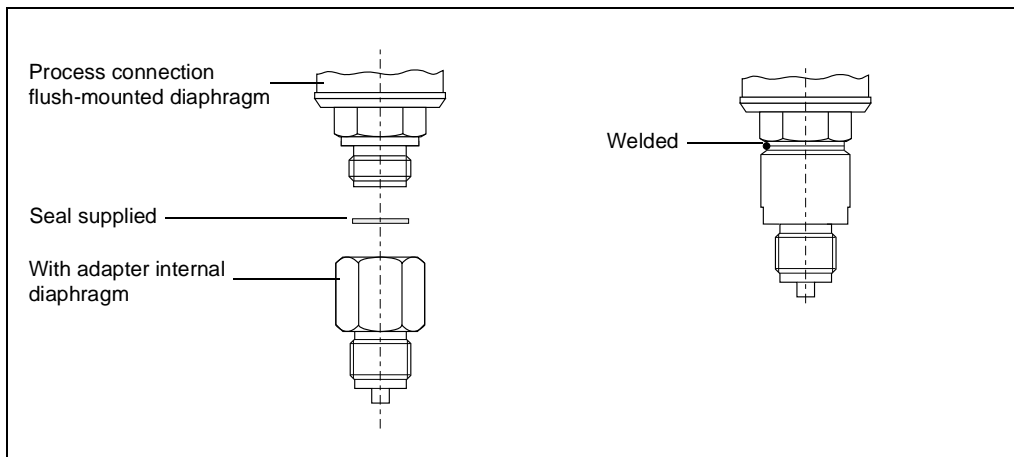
PPC-M10 with screwed or welded adapter. With welded adapter max. torque 80 Nm
